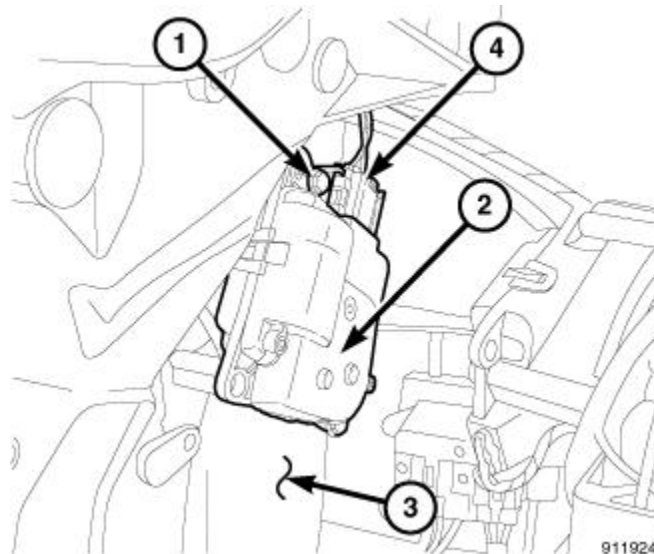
Blend Door Actuator, Distribution Housing, Wire Harness Connector & Screws
